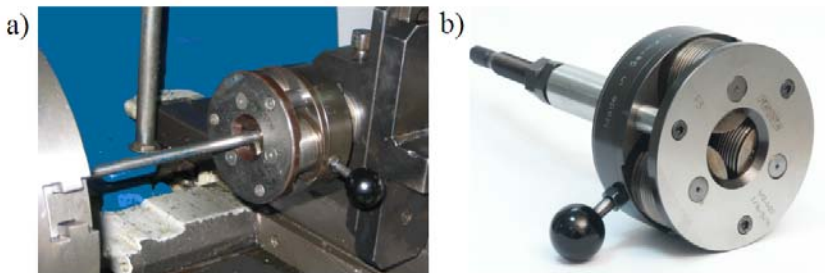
a) A photograph of the burnishing rolling tool and b) detailed view of the burnishing rolling tool assembly.
